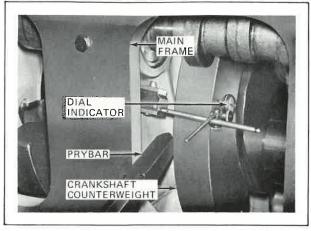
CHECKING CRANKSHAFT END-PLAY.
